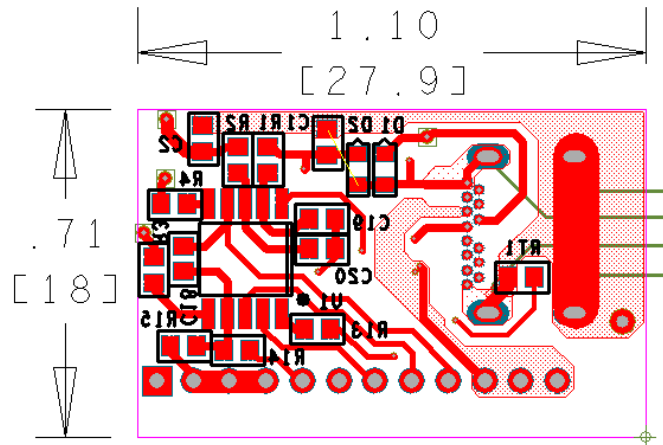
Printed Circuit Layout, Daughter Board, Bottom.
